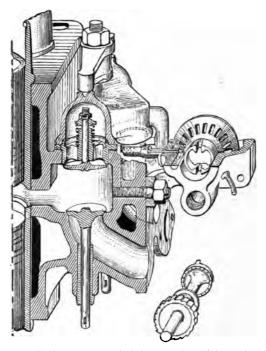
Cadogan heavy-freight petrol vehicles. Sectional view of carburettor.
